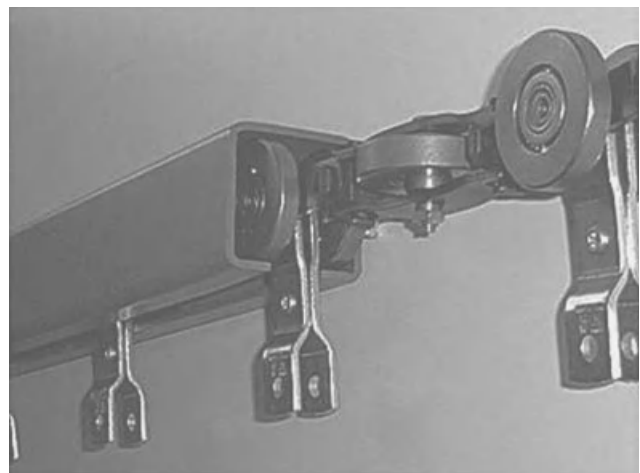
Enclosed track and wheeled drive chain. (From [8].)
